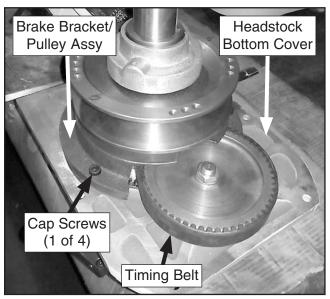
G0797 headstock bottom cover removed to expose brake bracket.
